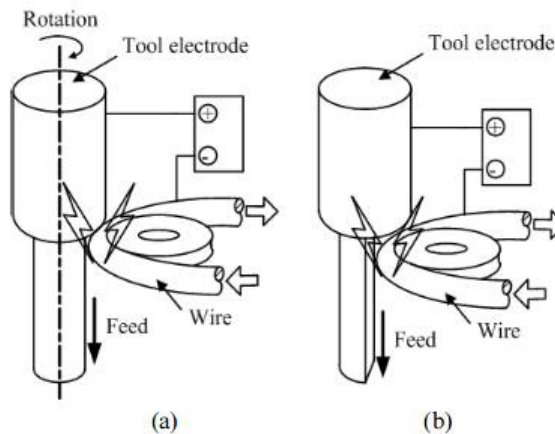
Schematic diagrams of the tool electrode fabrication: (a) cylindrical tool and (b) semi-cylindrical tool (Yang, Park and Chu, 2009)
